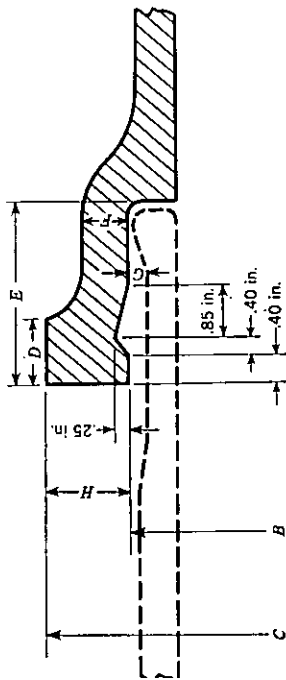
Bell-and-Spigot Bell Dimensions and Tolerances (See Table 10.12)
